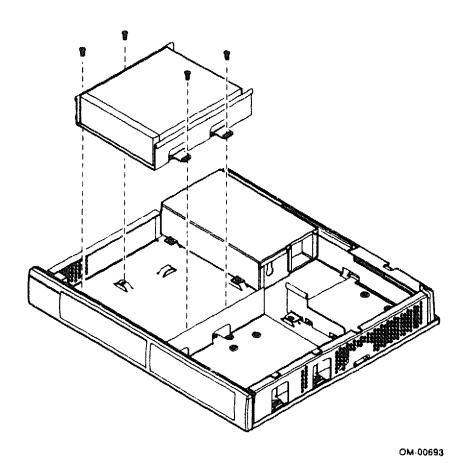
Removing a SCSI Device (5.25-Inch Mounting Tray
